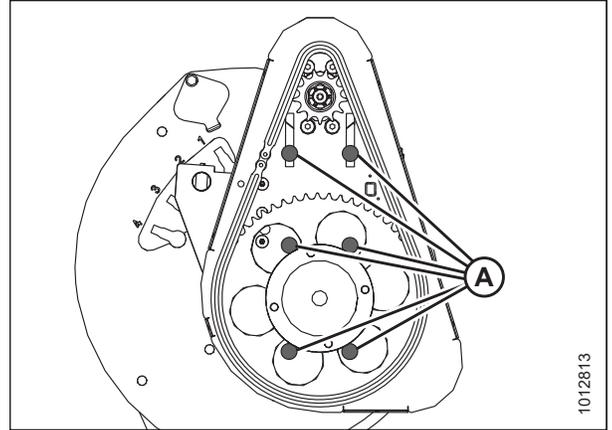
Single-Reel Drive Shown – Double Reel Similar
